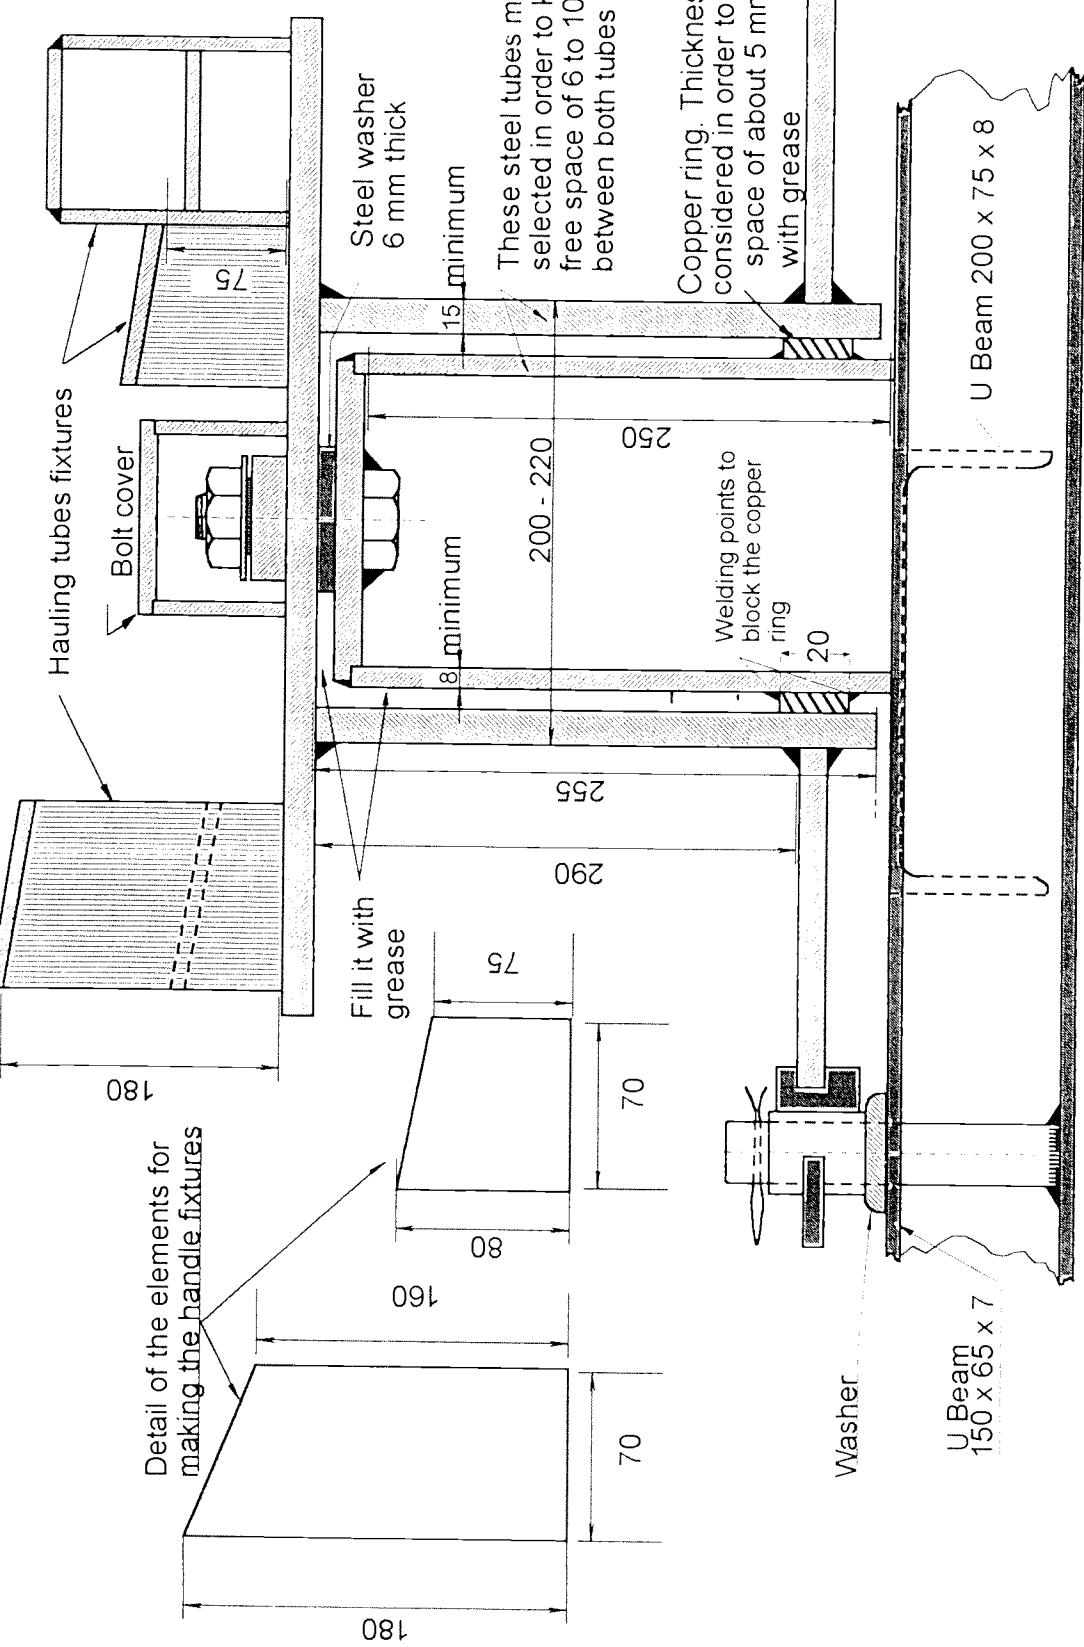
THE CAPSTAN'S DRUM COMPLETELY ASSEMBLED
